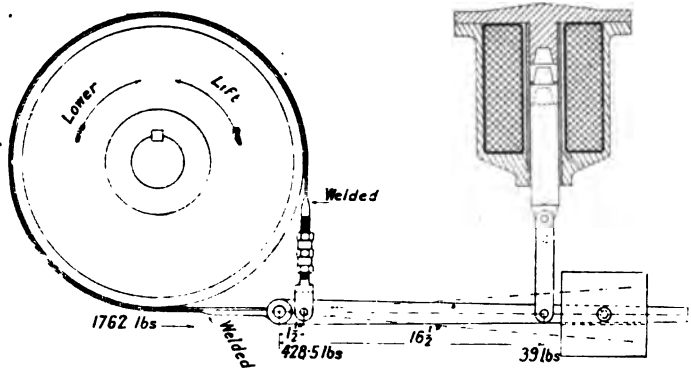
Flanges of brake drum not shown ; drum 3 inches wide between flanges.
